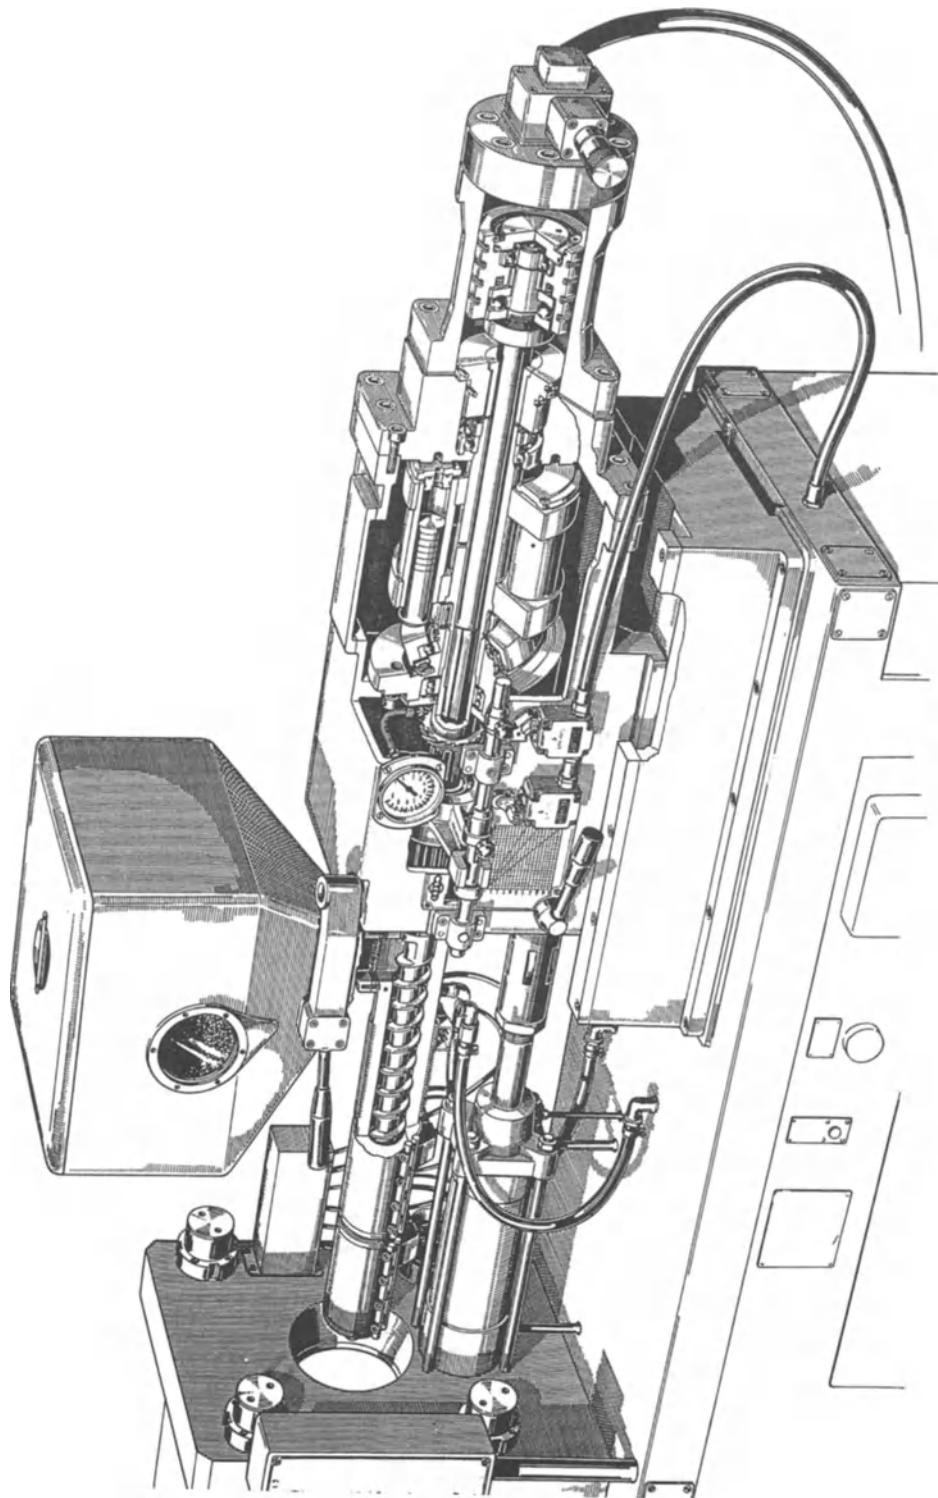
Cut-out view that shows one design of a reciprocating screw operation.
